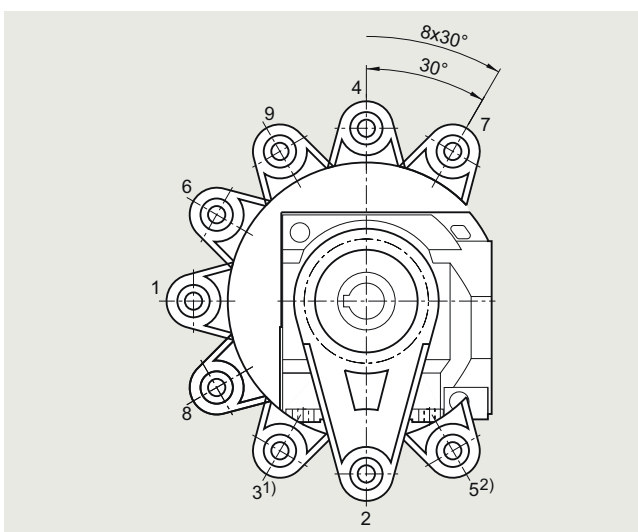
/10 Helical worm gearboxes CAD, Figure 1, sizes 39A to 89
